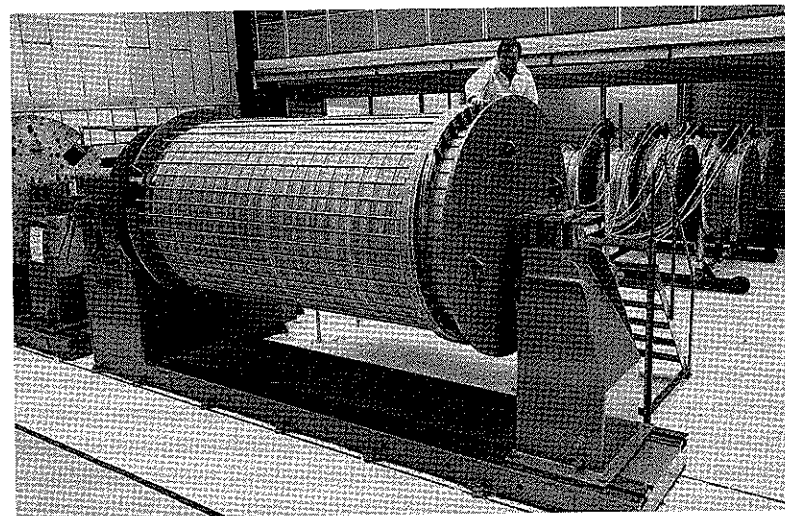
Winding in progress – horizontal lathe (Peebles Transformers)
